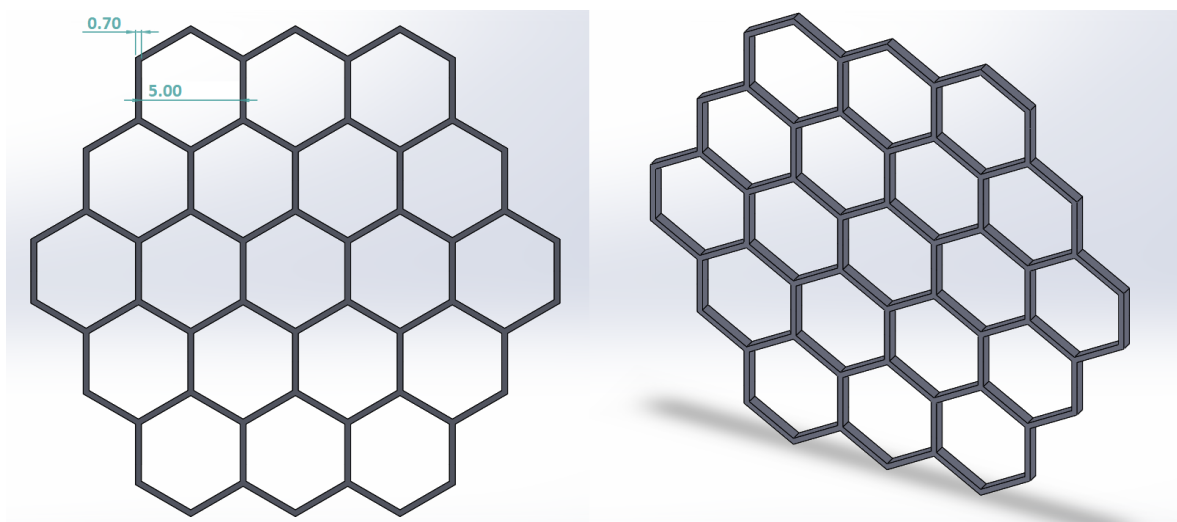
CAD model: 2D- view (left) and 3D-view (right)
